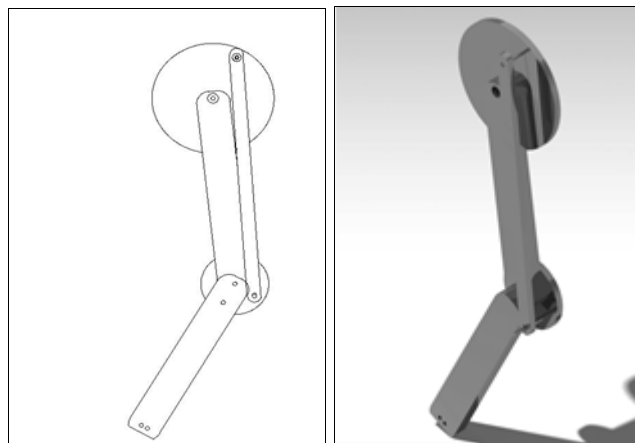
Assembly of Part Models using CATIA V5 2009.
